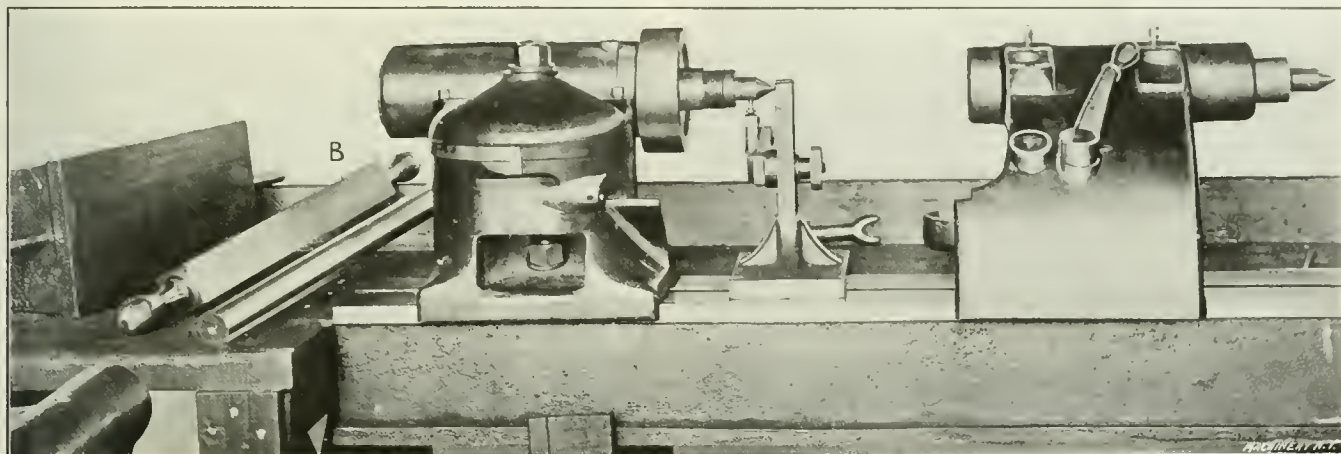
Preliminary Test to determine Parallelism of Headstock and Tailstock Spindles with Base
